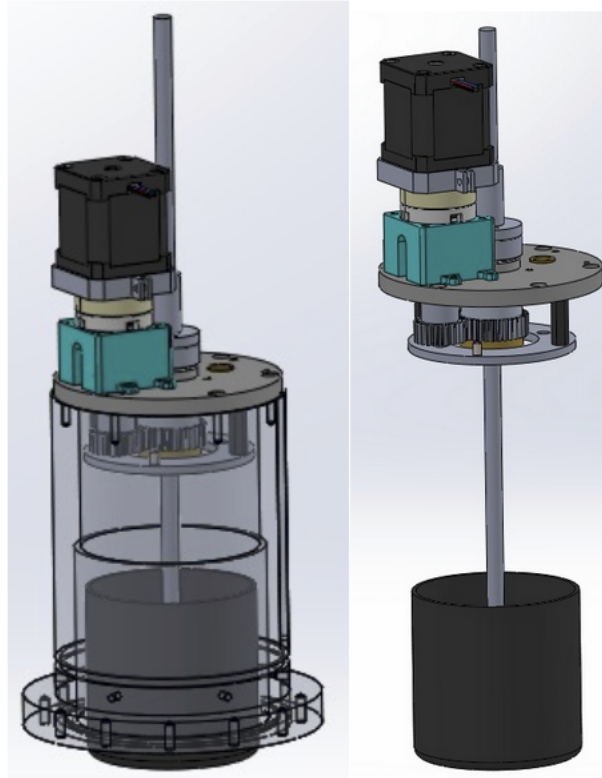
The redesigned buoyancy mechanism, motors, and gearbox, for stepper motor.
